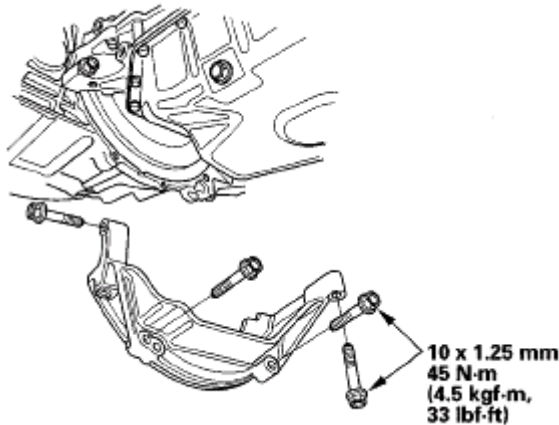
Identifying Clutch Cover Bolts With Torque Specifications
